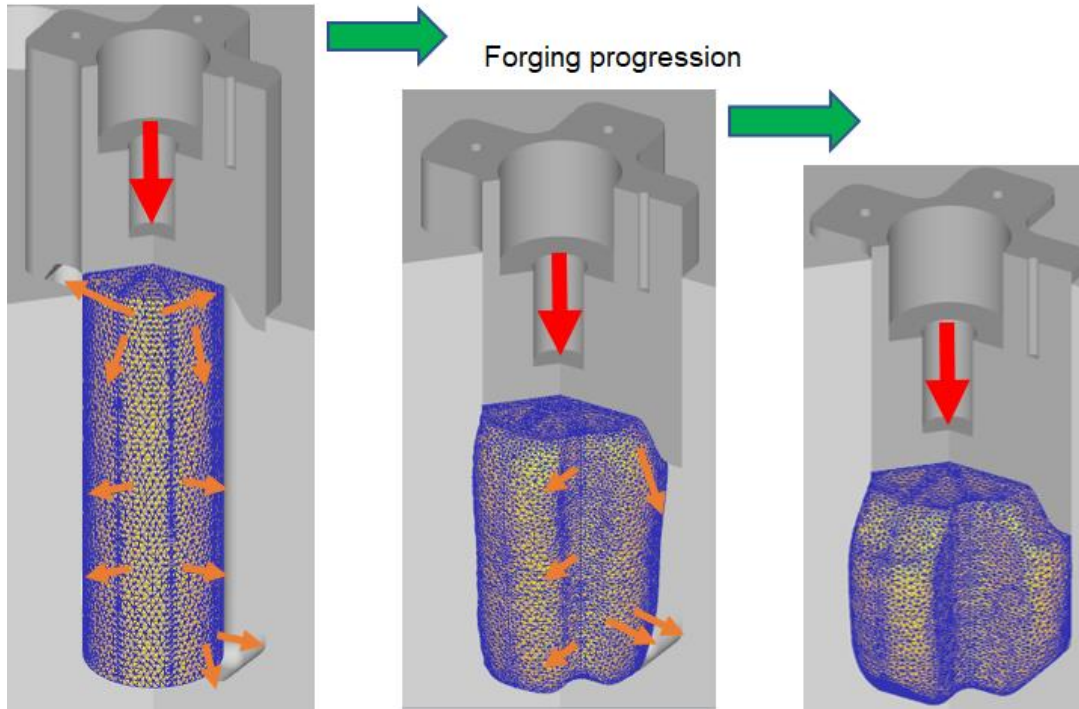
Complexity in 3-Dimensional Material flow in forging
